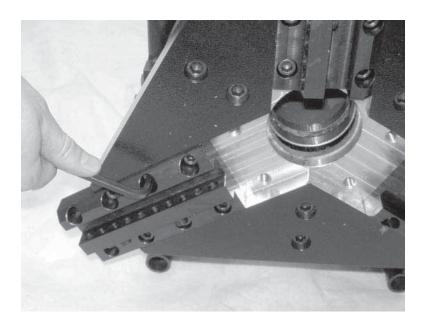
The photo shows the tool holder moved to the "outer" position for larger diameter pipes.
